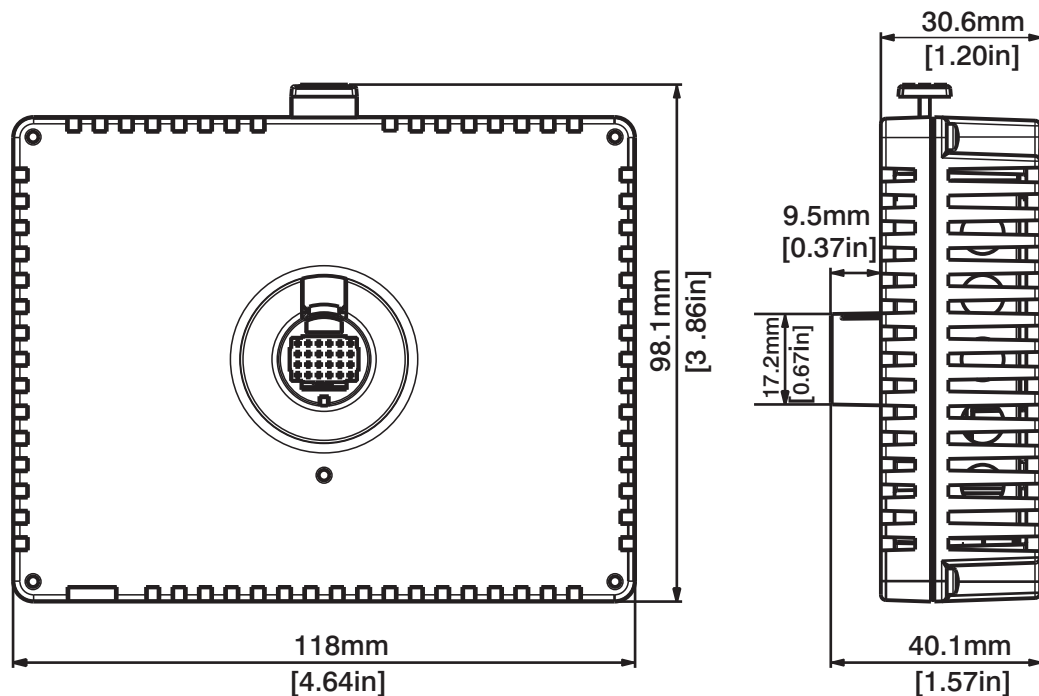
DIS3500/DIS5700 Back Dimensions
